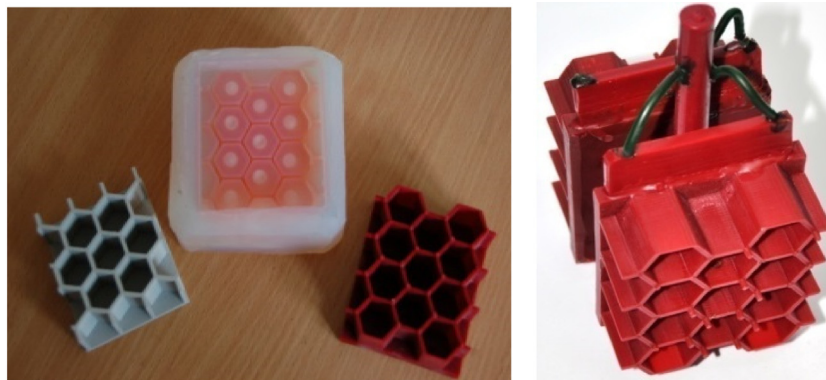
Silicone mould and the assembly of wax patterns and gating system.
